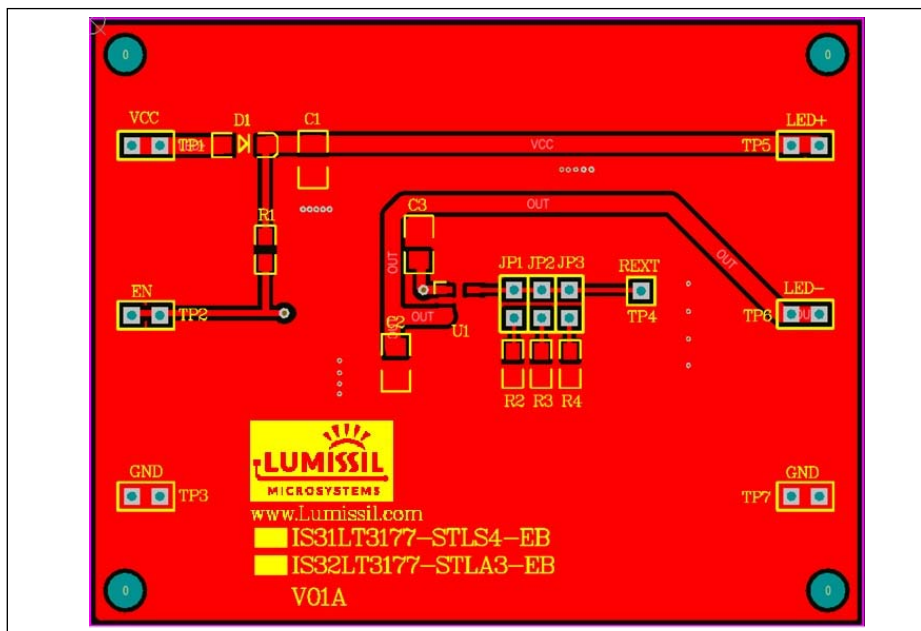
Board PCB Layout - Top Layer (SOT23-6)
